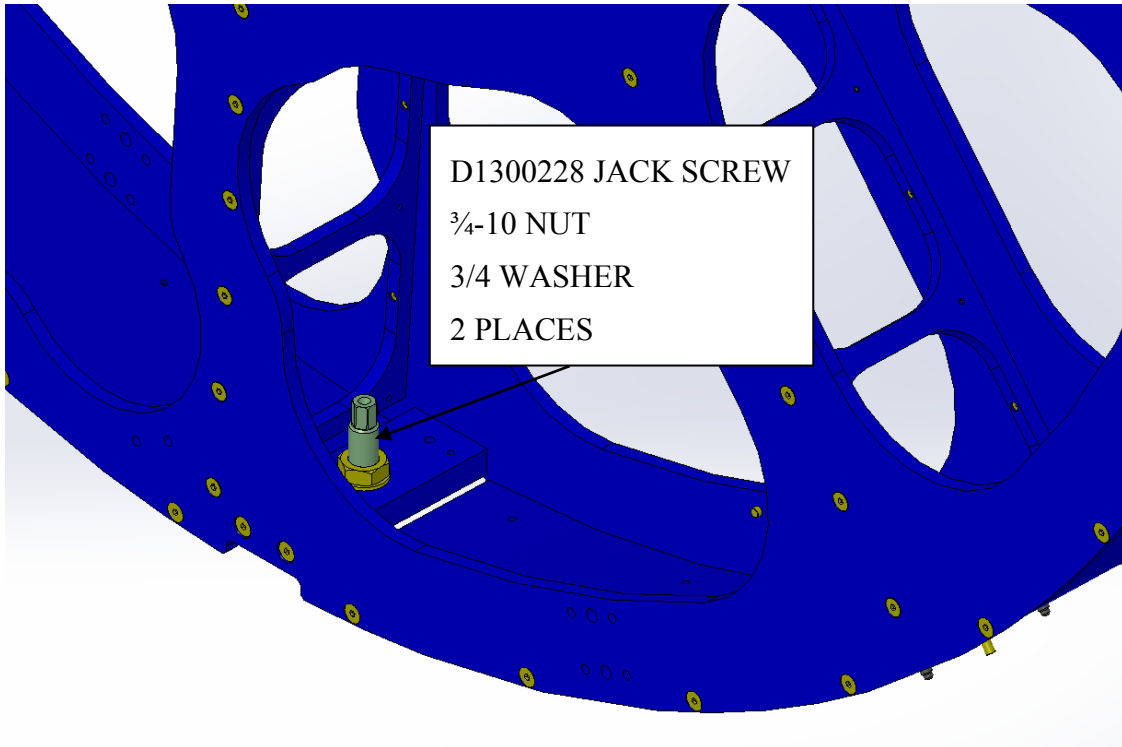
Jack Screw with jam nut and washer (temporary tooling for installation of completed Periscope Assembly D1200174).
